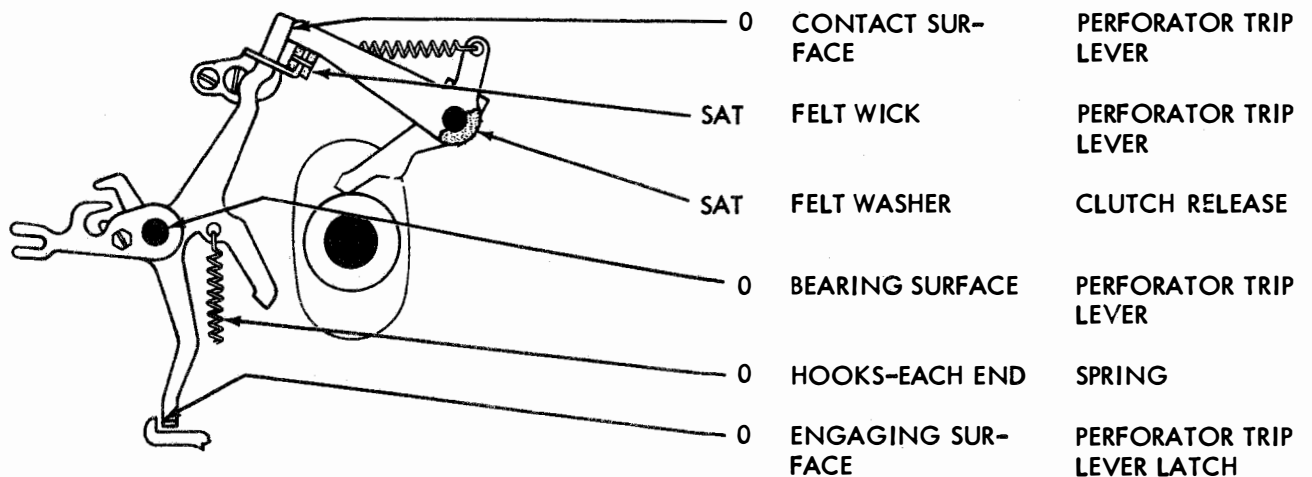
Perforator Trip Lever Mechanism (Non-Typing)
